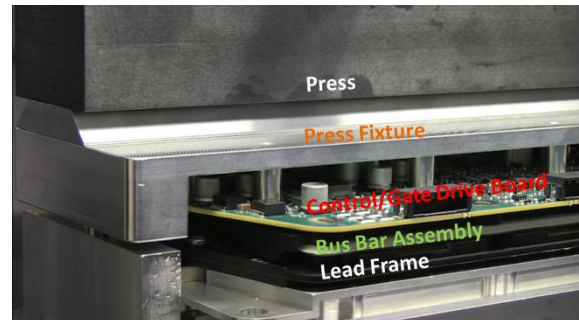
Pressing Control/Gate Drive Board onto Lead Frame.
